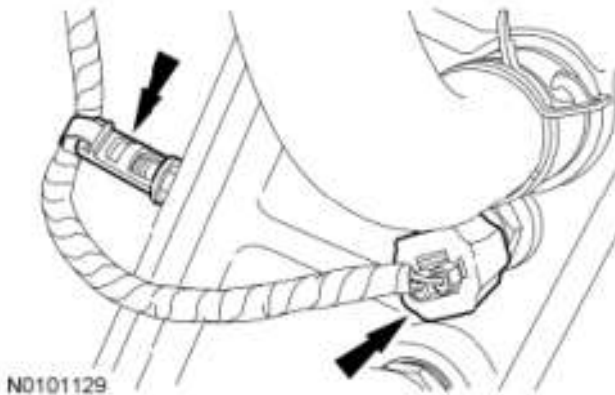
Locating Transaxle Coolant Temperature Sensor Electrical Connector
